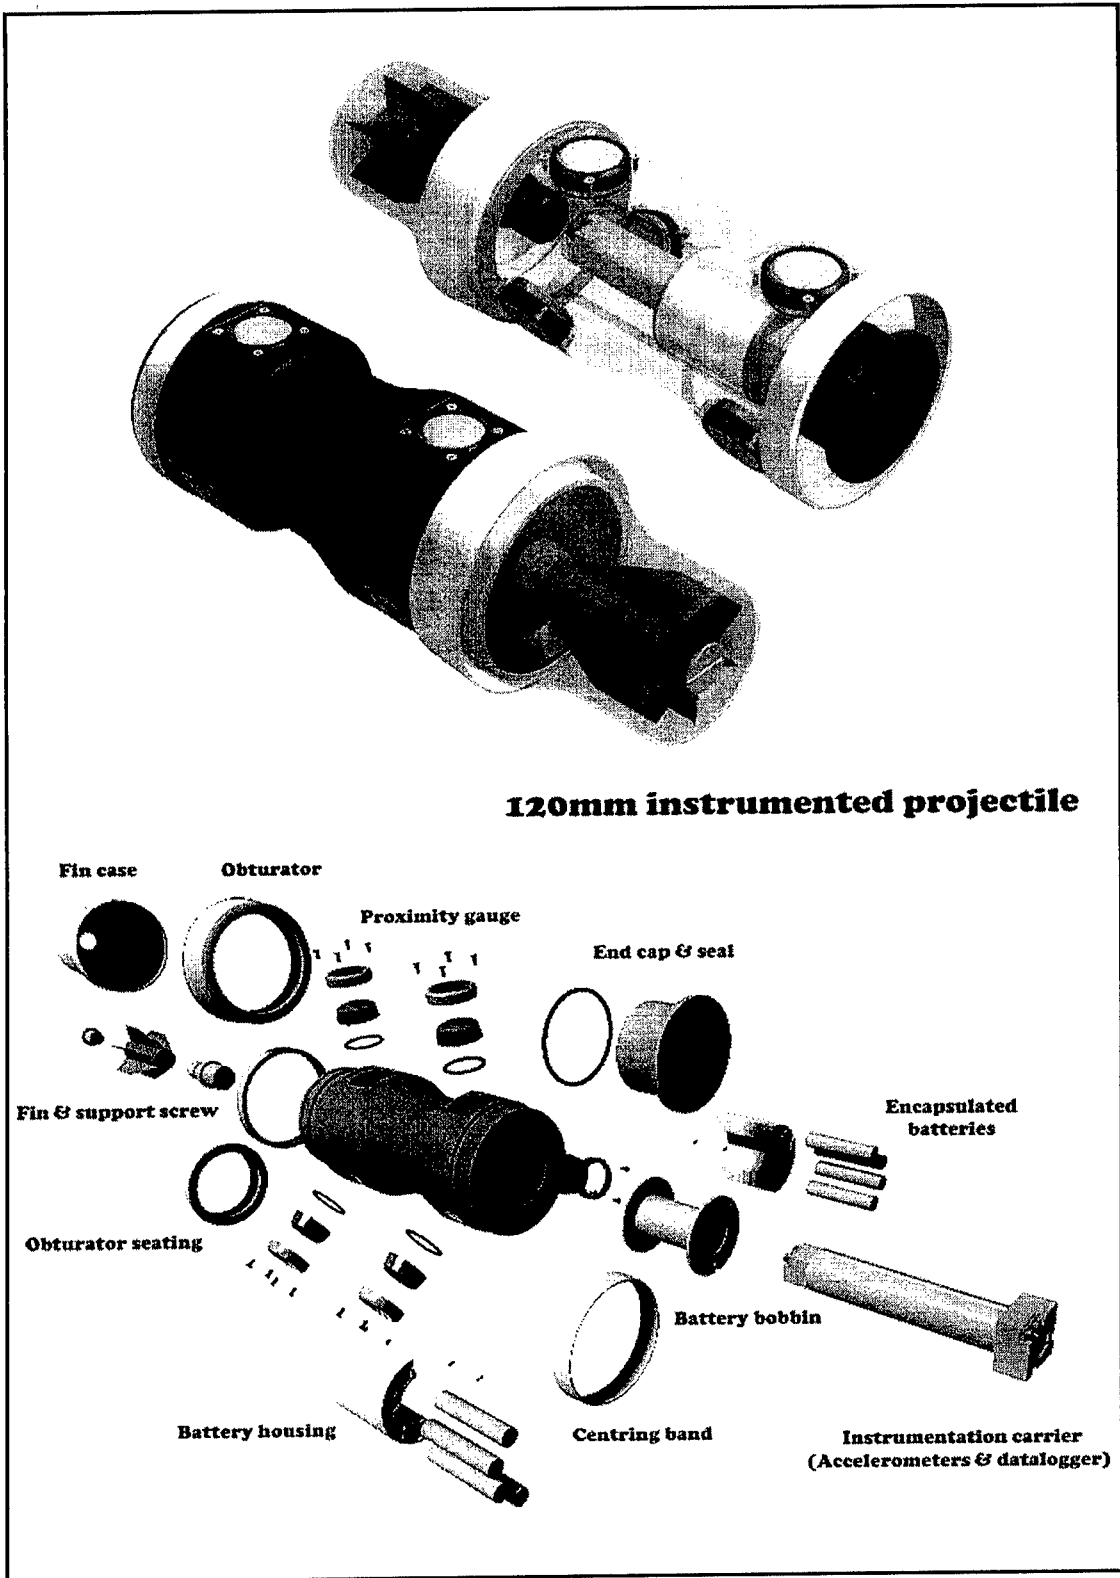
Exploded view of the 120mm instrumented projectile.
